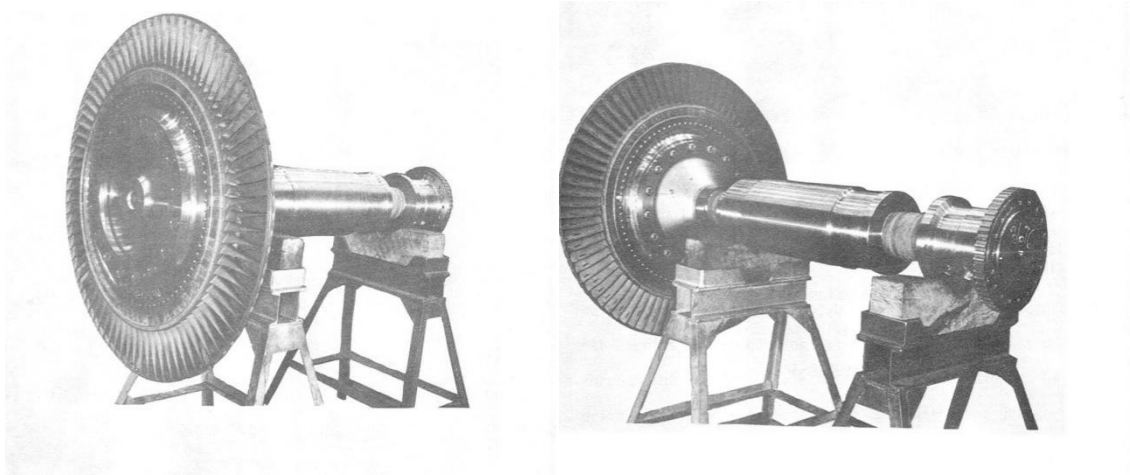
Front view (left) and Rear view (right) of the low pressure (load) turbine wheel.
